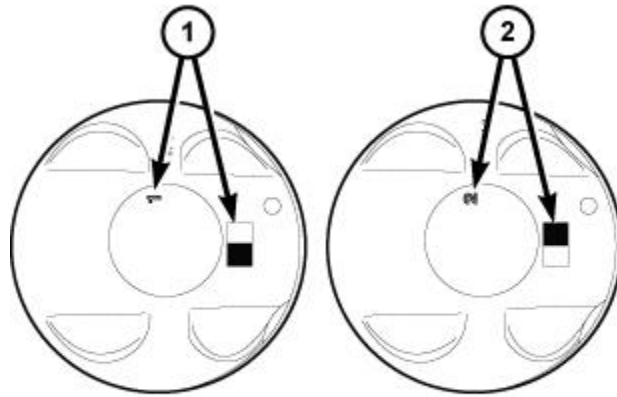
Engine Block Main Bearing Journal Diameter Grade Markings
